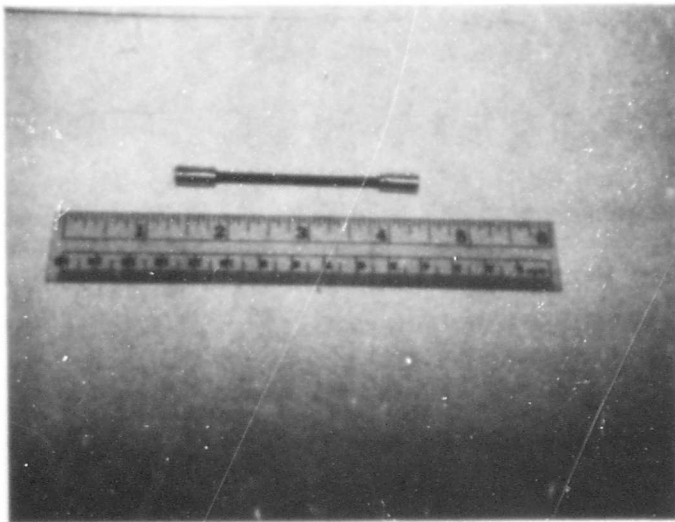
ROTAN PICK UP COUPLING DEVICE
